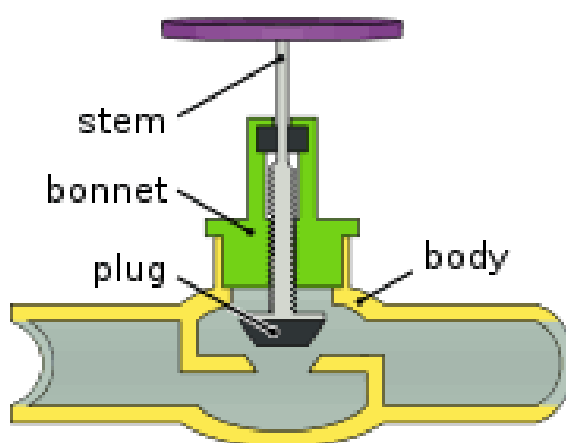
SHOWING A TYPICAL GLOBE VALVE.
